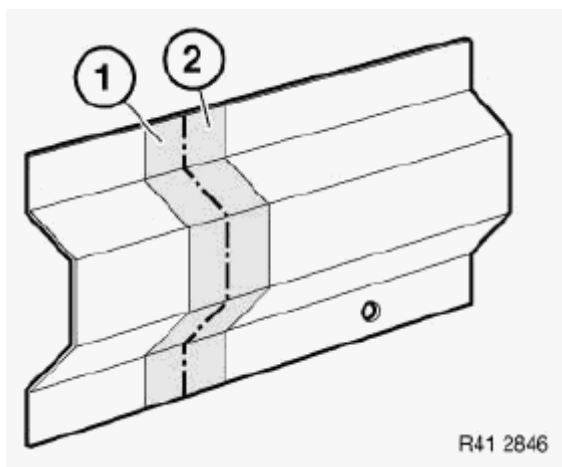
Welding In Reinforcement Plate - Areas Part And Body
